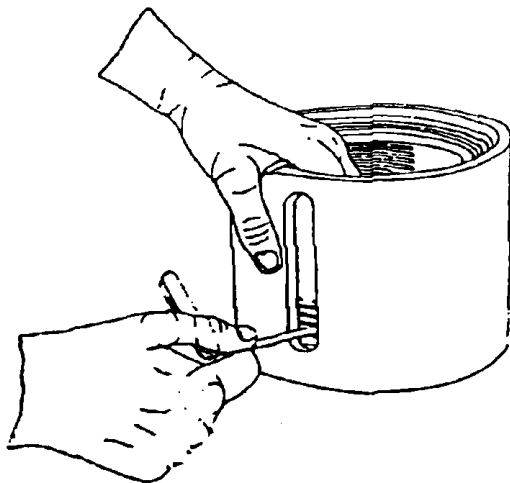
Measuring Side Clearance of Wedge Type Piston Rings
